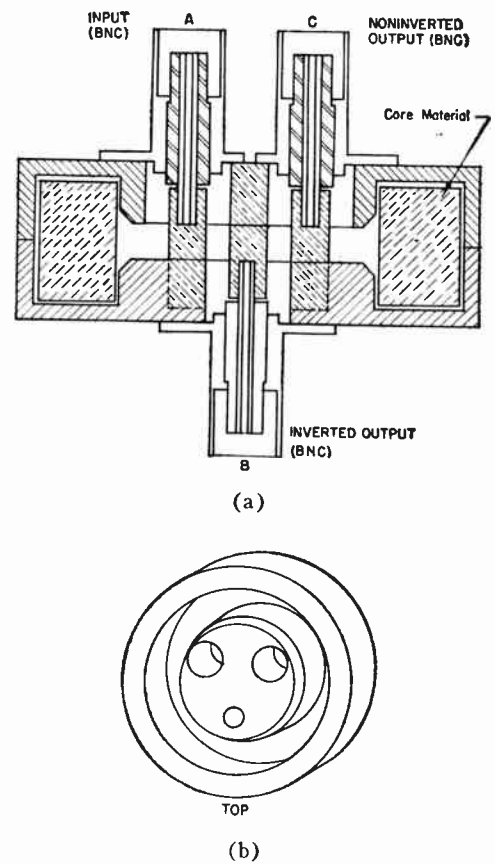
Details of balun transformer construction. (a) Assembled cut-away. (b) Inside view (cross-connecting rods and coaxial connectors removed).
